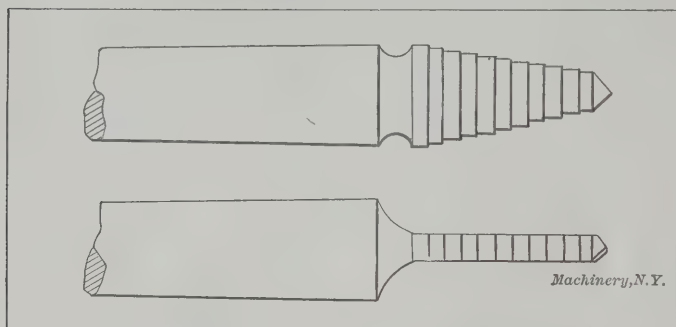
Combined Drill and Reamer after the Turning and Milling Operations
